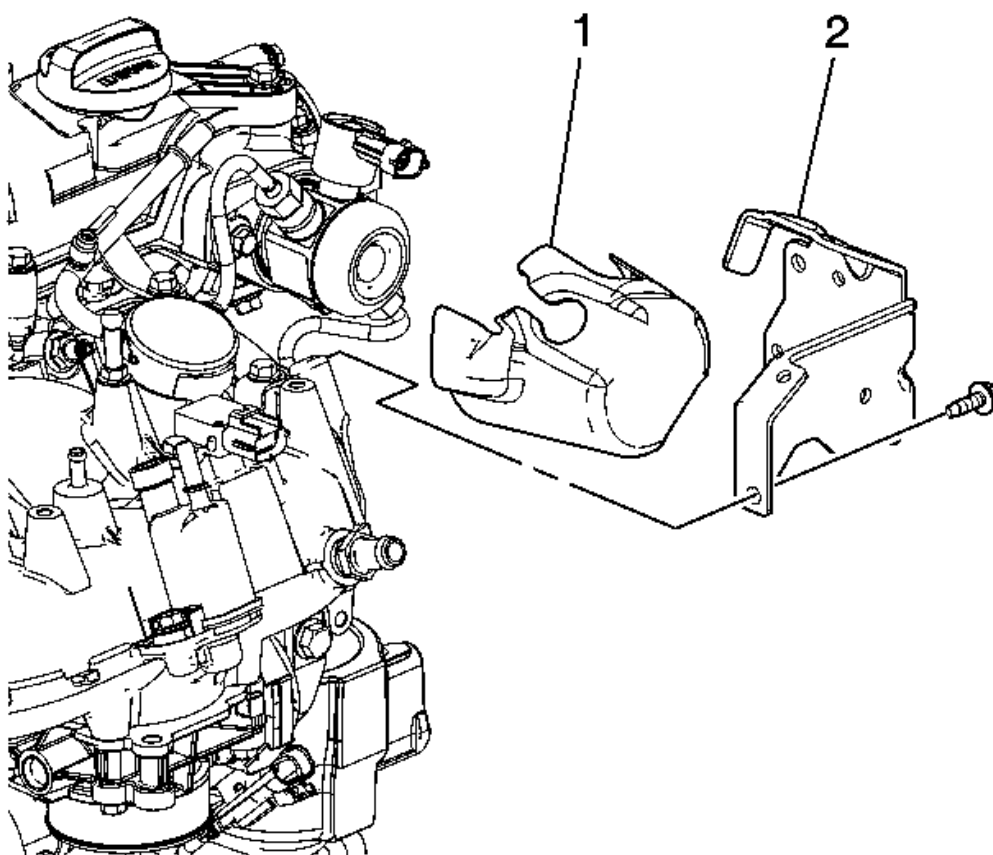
High Pressure Fuel Pump Cover And High Pressure Fuel Pump Noise Insulator
